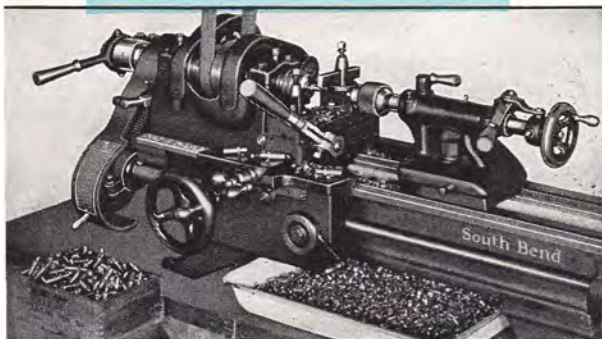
"Workshop" Lathe equipped with Hand Lever Collet Attachment.
